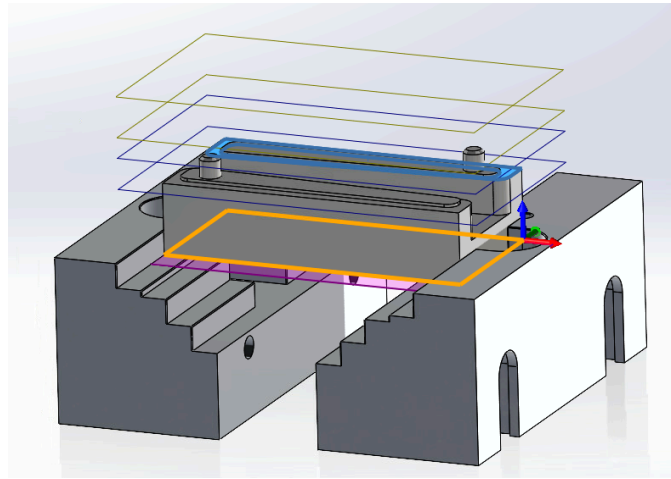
Stock Setup and Toolpath Heights in Fixture Assembly
